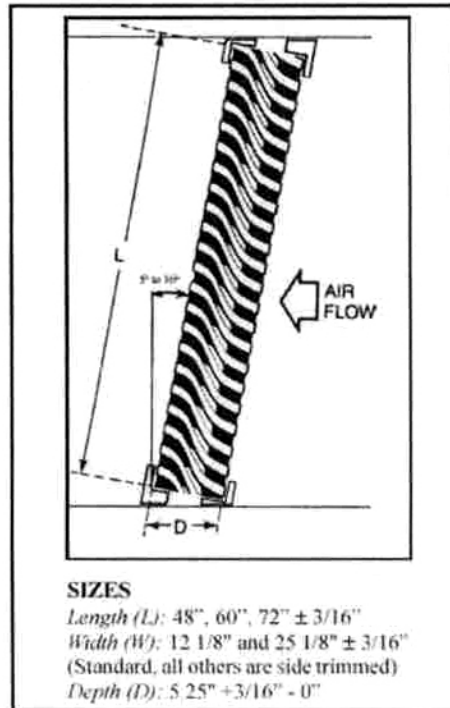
View of a Mist eliminator with its dimensions and installation angle
